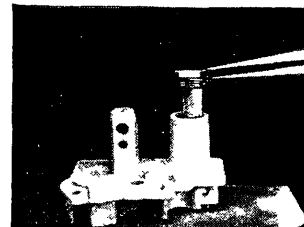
To assemble, install strainer and strainer nut and new gasket
